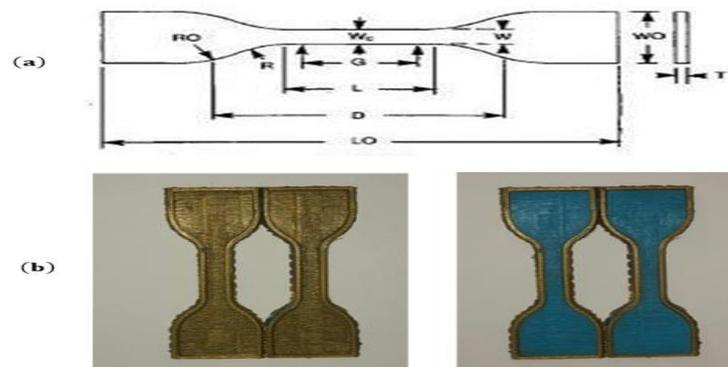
(a) geometry of the specimen used in the test according to ISO 37 standard [36], (b)specimens used in test.
